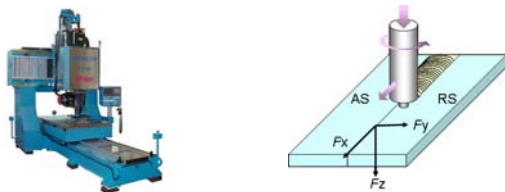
CNC controlled 3-D FSW system “Hitachi GR-3DM10T” with 11 KW spindle servomotor and description for the welding process.
